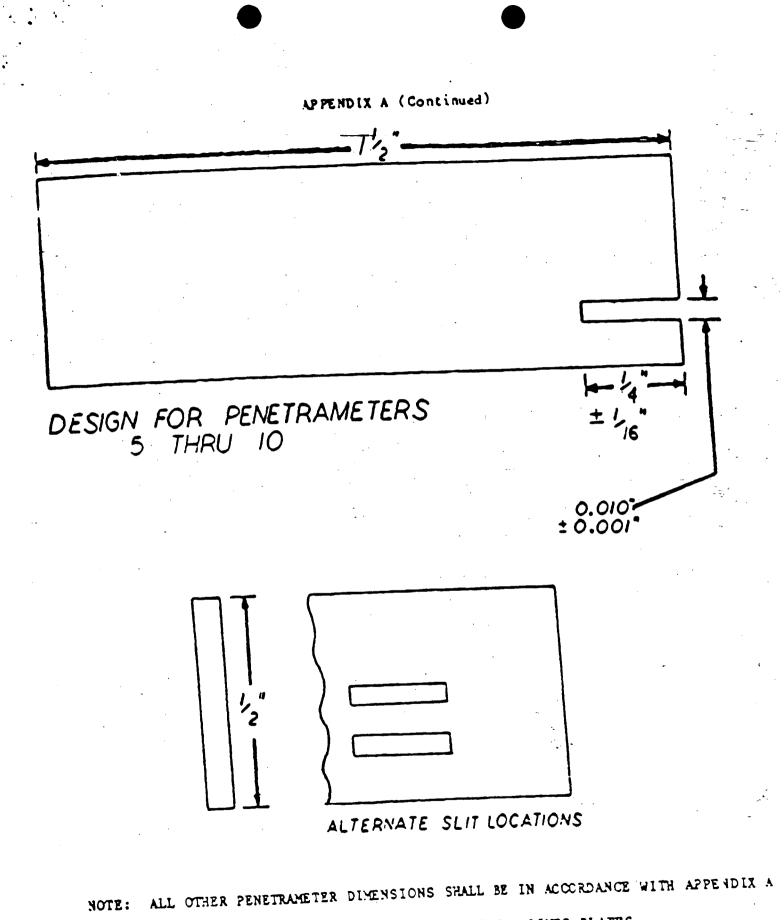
PENETRAMETER DESIGN - LINER PLATES
